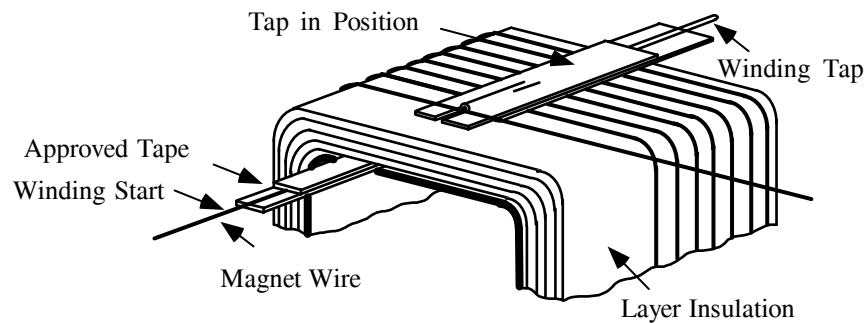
Tap Lead Crossing Over a Winding.
